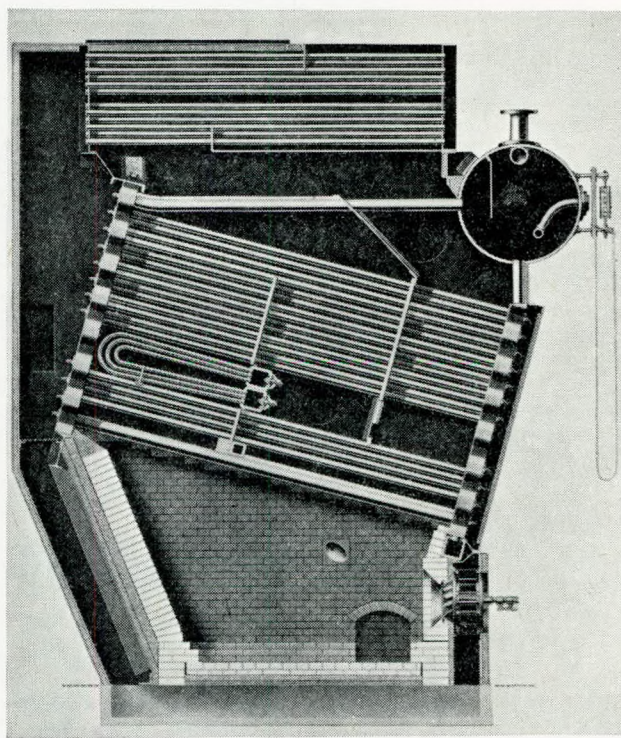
Longitudinal section of 2-in. tube header-type boiler with interdeck superheater and air heater.
